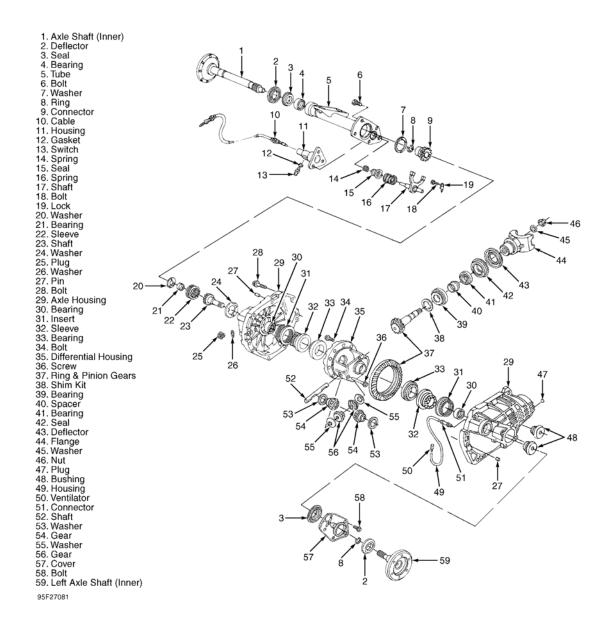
Exploded View Of 4WD "T" Series Front Axle Assembly Courtesy of GENERAL MOTORS CORP.
